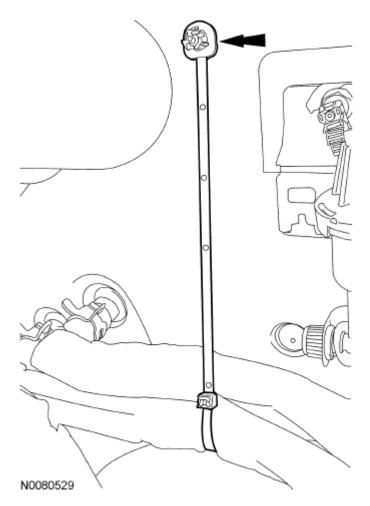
Locating Upper Radiator Hose Courtesy of FORD MOTOR CO.
